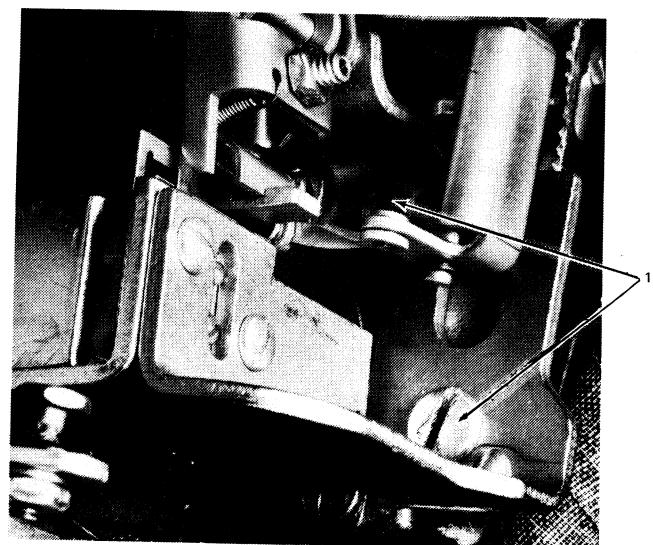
Print Feedback Removal (Printer Tilted Up)
